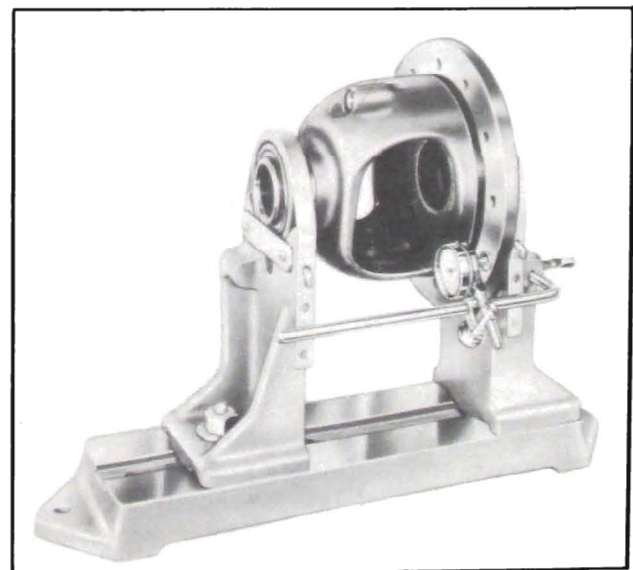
Checking Run-Out of Case Flange in Fixture U 4-B
